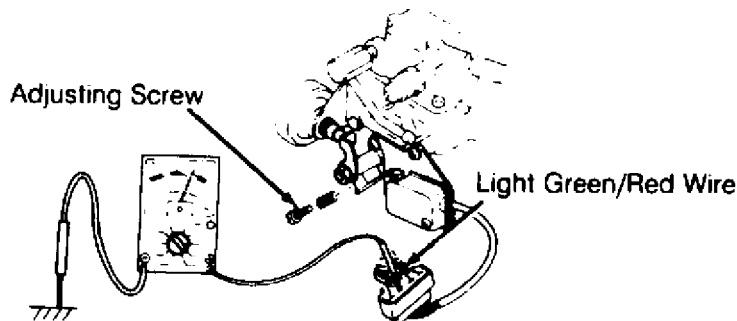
Adjusting Throttle Switch (B2200 Carbureted)
